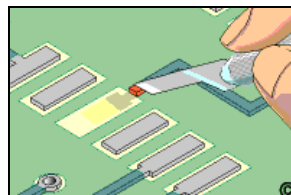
Remove the defective pad and soldermask from the connecting circuit.
